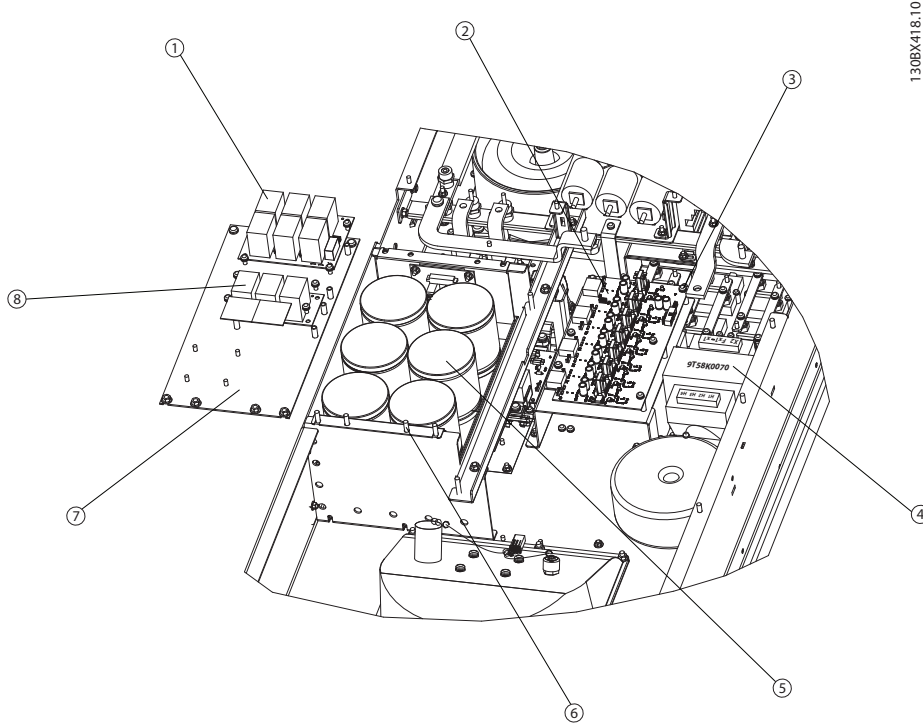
Gate Drive Card, Contactor Transformer, CM and RM RFI Cards, and Capacitor Bank Assembly
